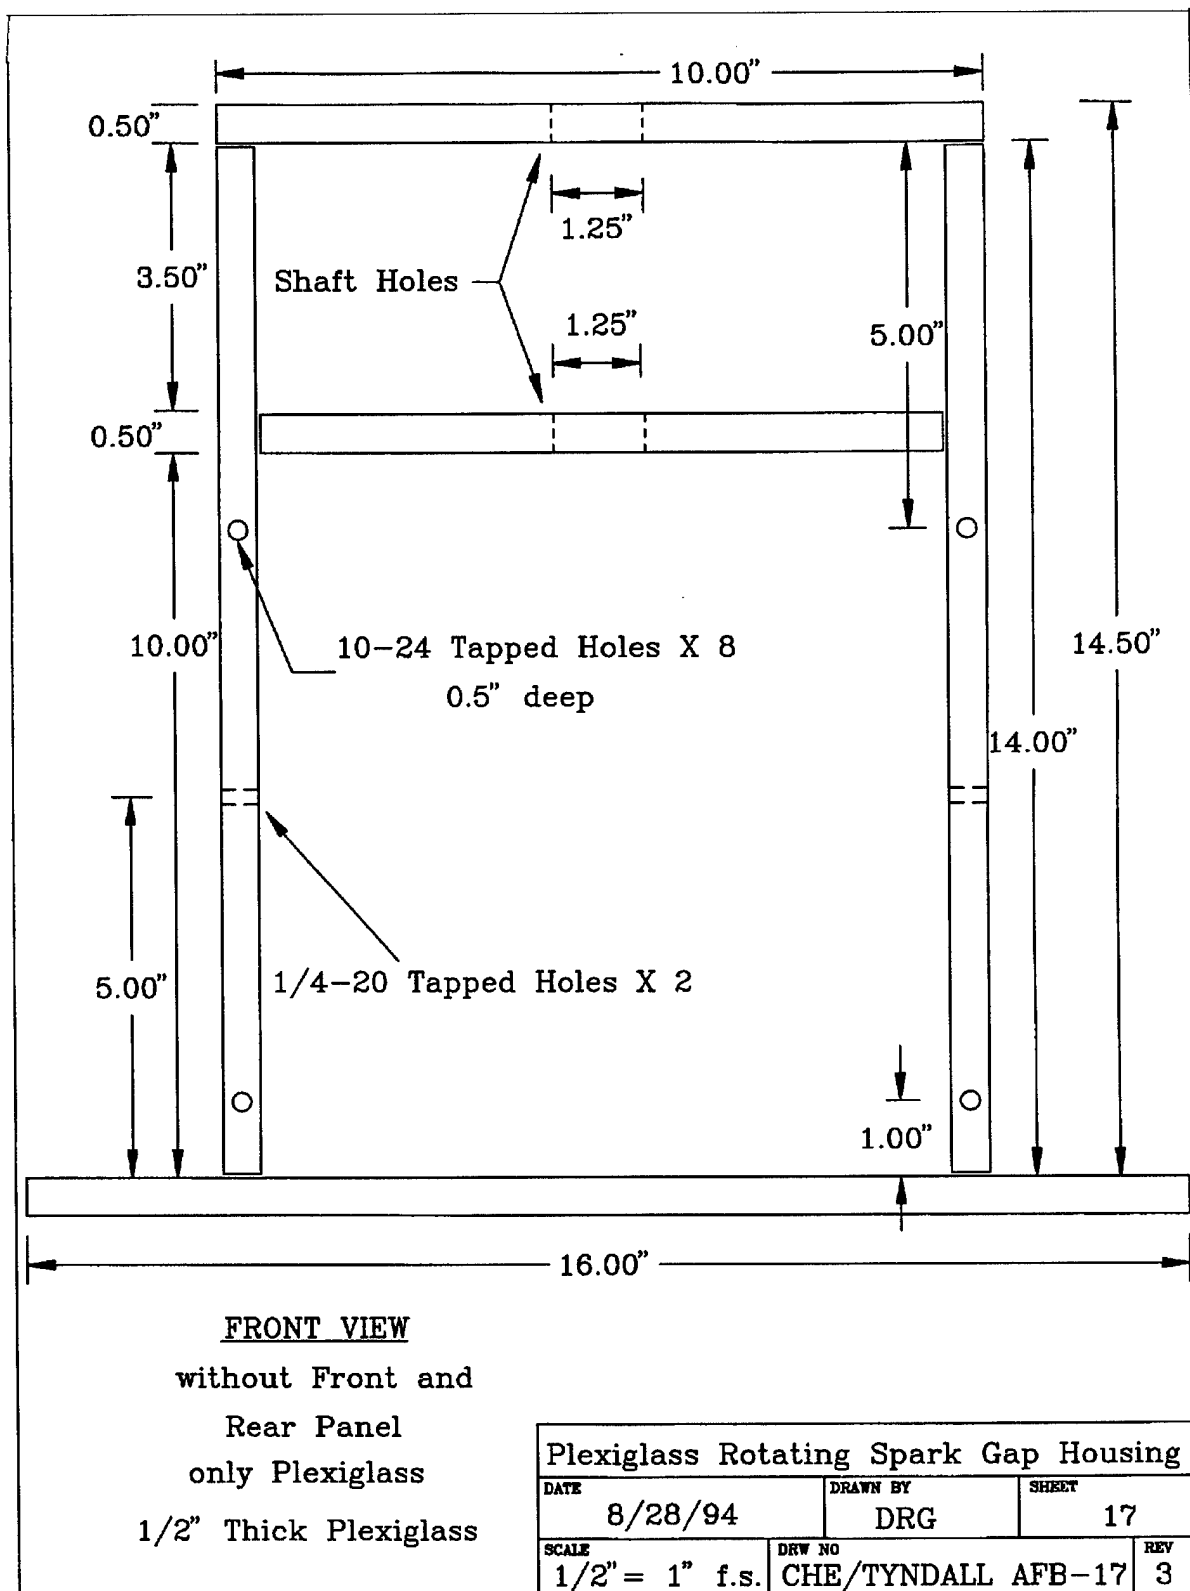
Plexiglas Rotating Spark Gap Housing - Front View (without Front and Rear Panels)
